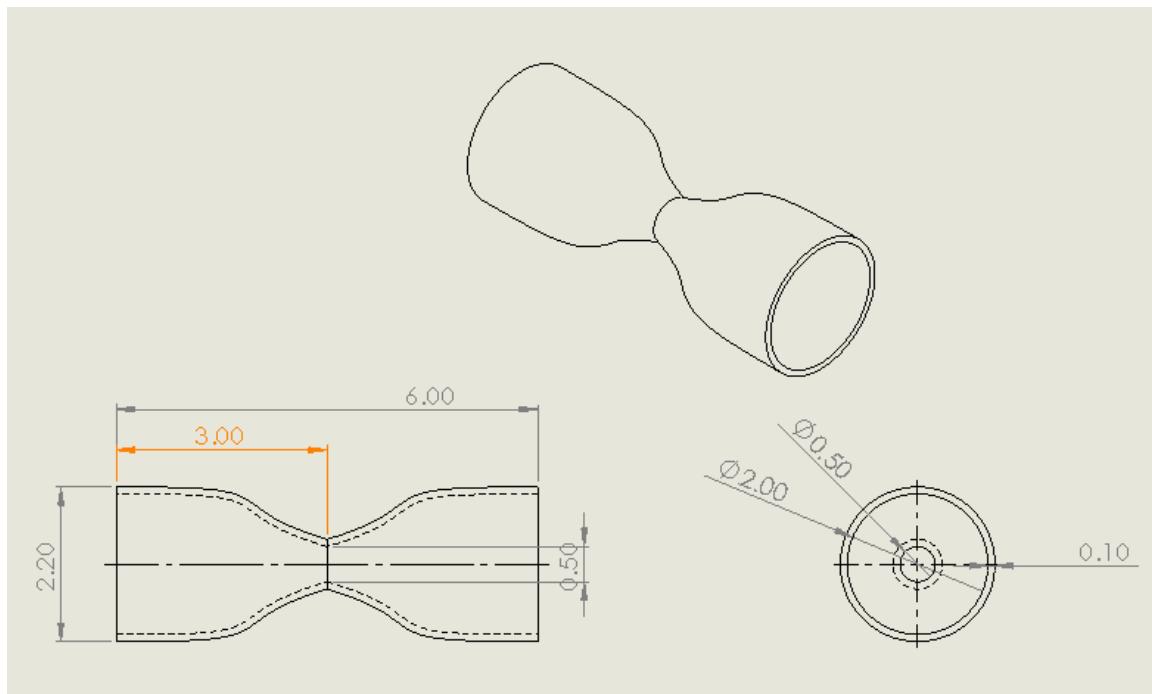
Solidworks Drawing of Model One-1(unit - inch)
